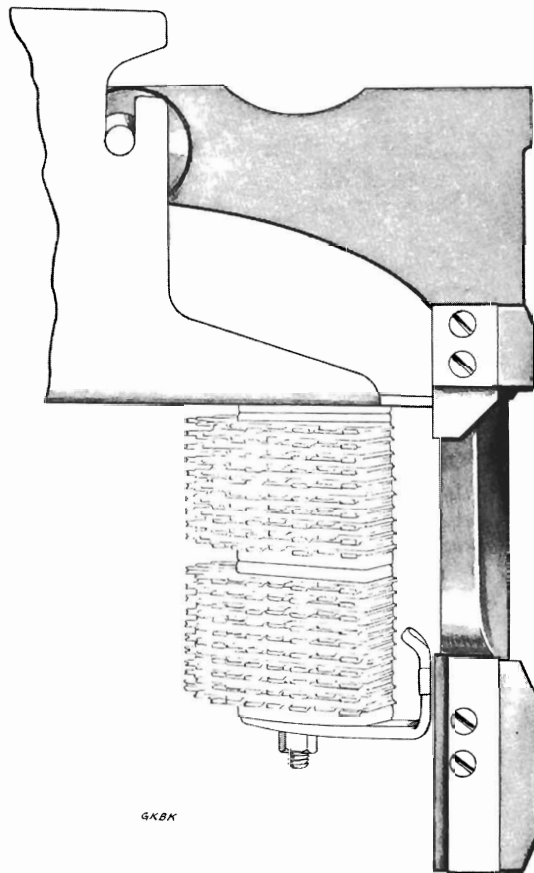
SHOWING VERTICAL ENGAGEMENT FACES
